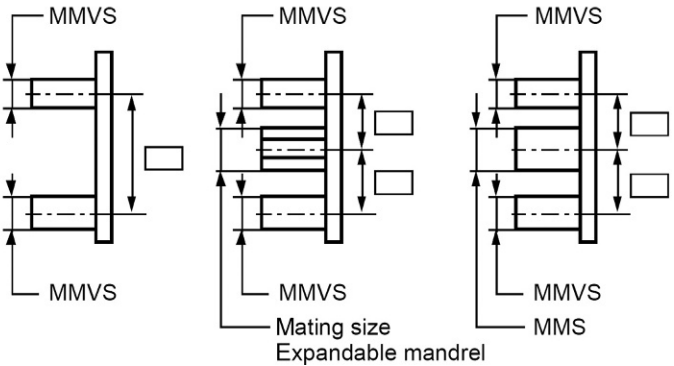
Inspection of the maximum material requirement with functional gauges
